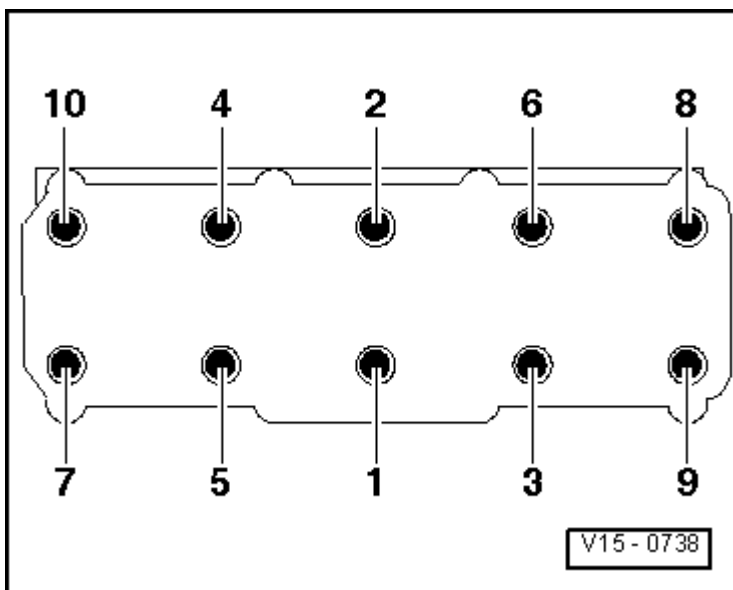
Identifying Cylinder Head Bolt Tightening Sequence
